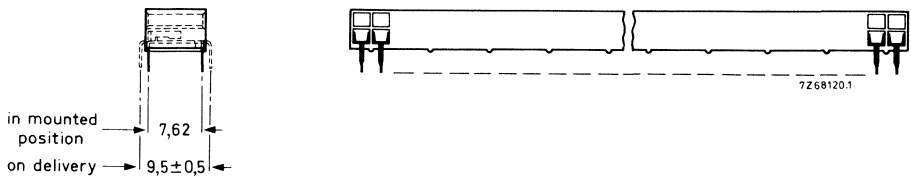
Board edge socket, single row. Dimensions are identical with those in Fig. 1a except as shown.
